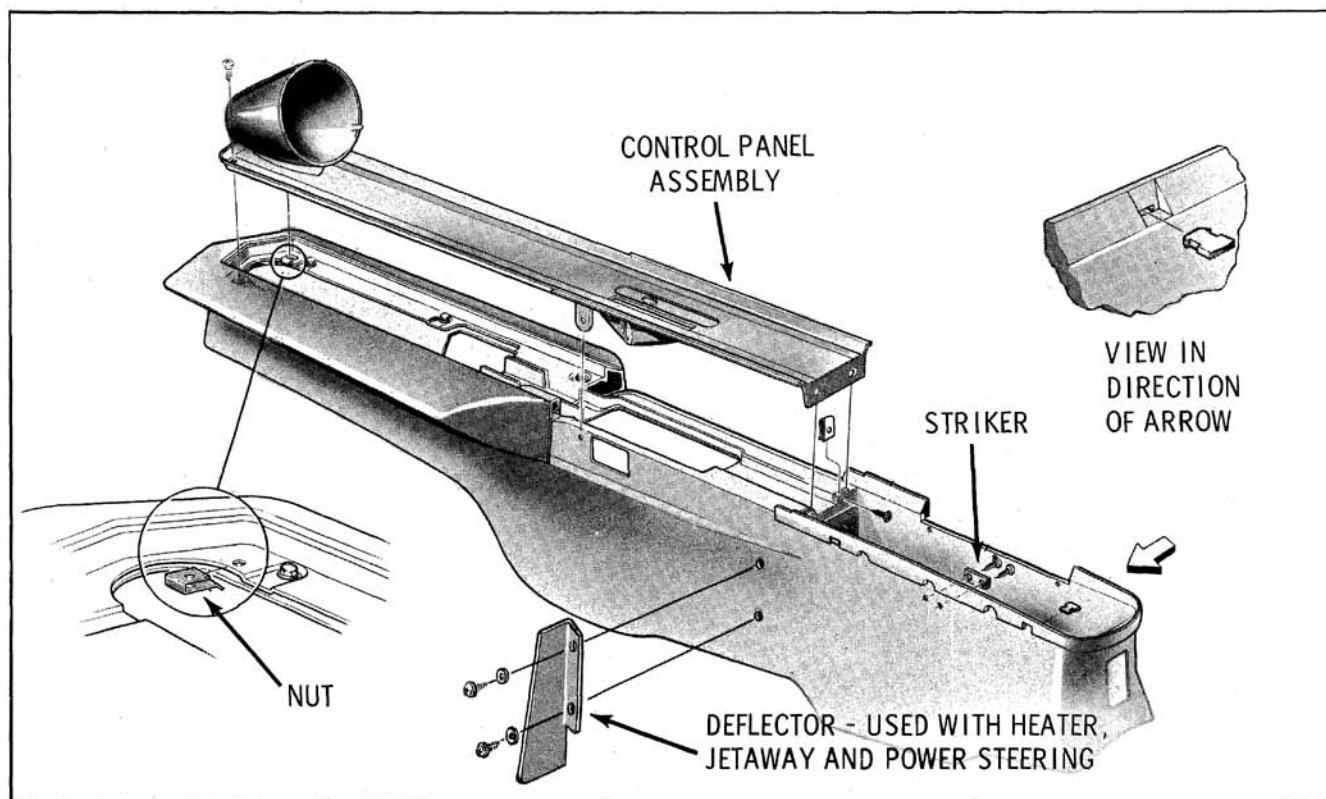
Control Panel to Console Attachment (Jetaway)
